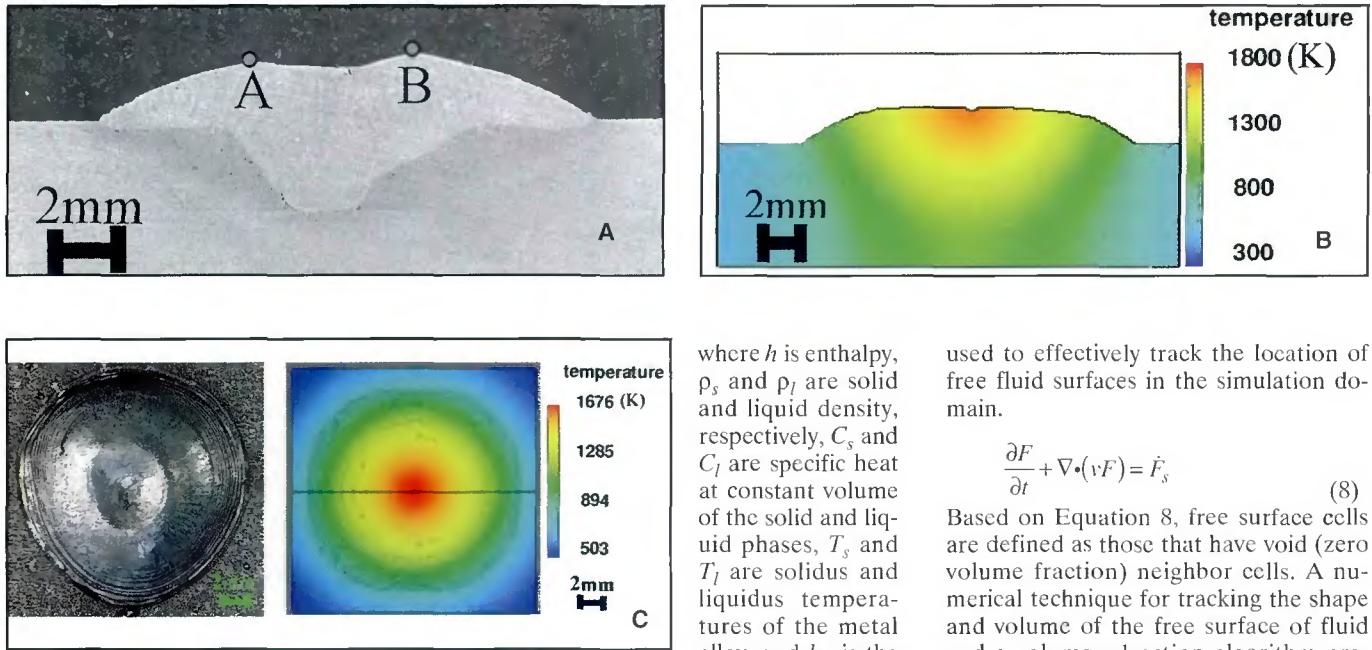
A — Cross sections of actual weld; B — simulated weld after the solidification of weld; C — top views of the weld for the experiment and the simulation.
